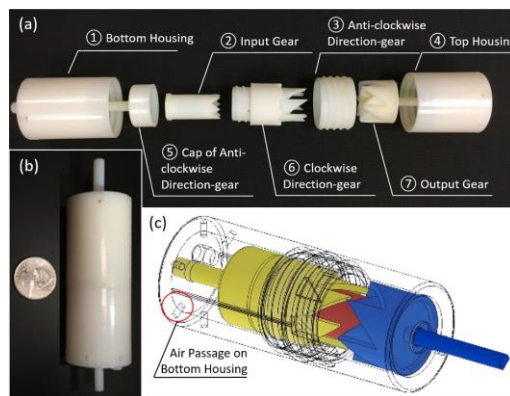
(a) Exploded component view, (b) dimension and (c) CAD model of the stepper motor.
